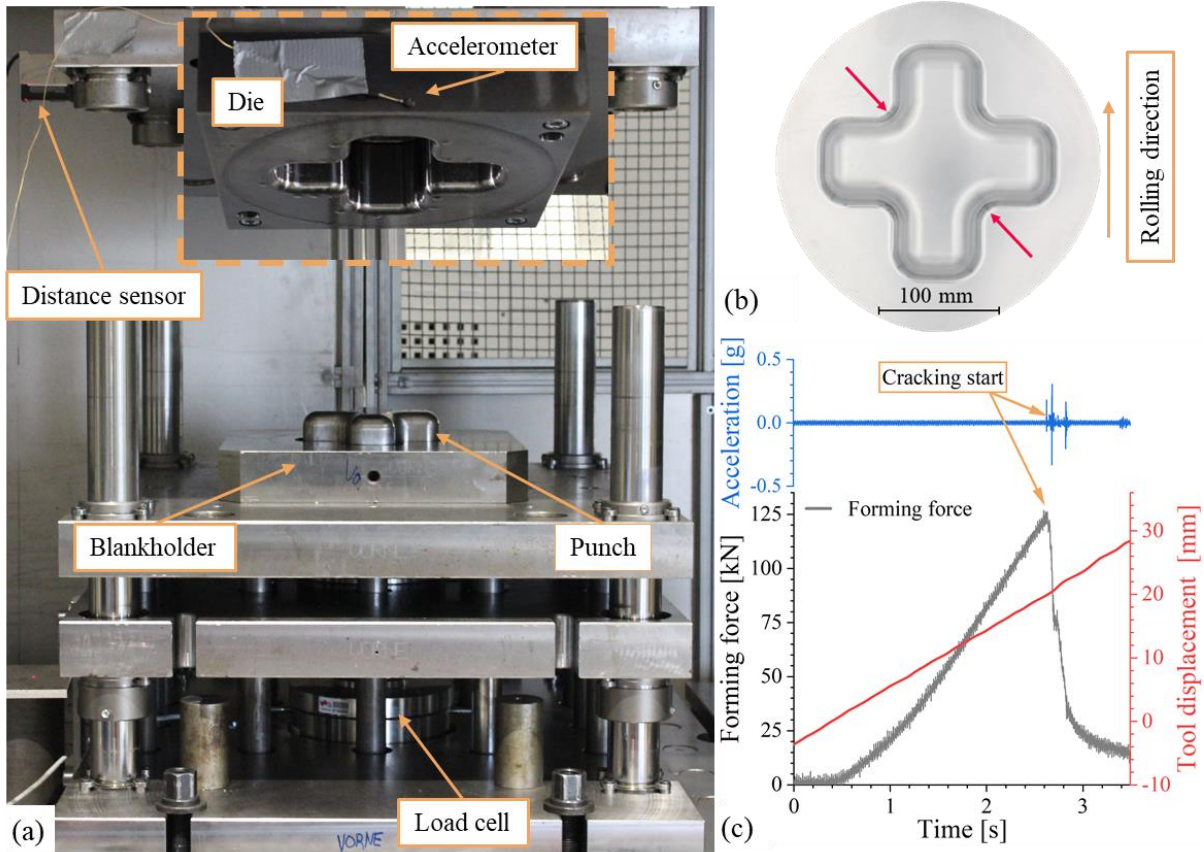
(a) Cross-shaped tool (CS-Tool), (b) component formed with the CS-Tool and (c) determination of maximum drawing depth with the CS-Tool
